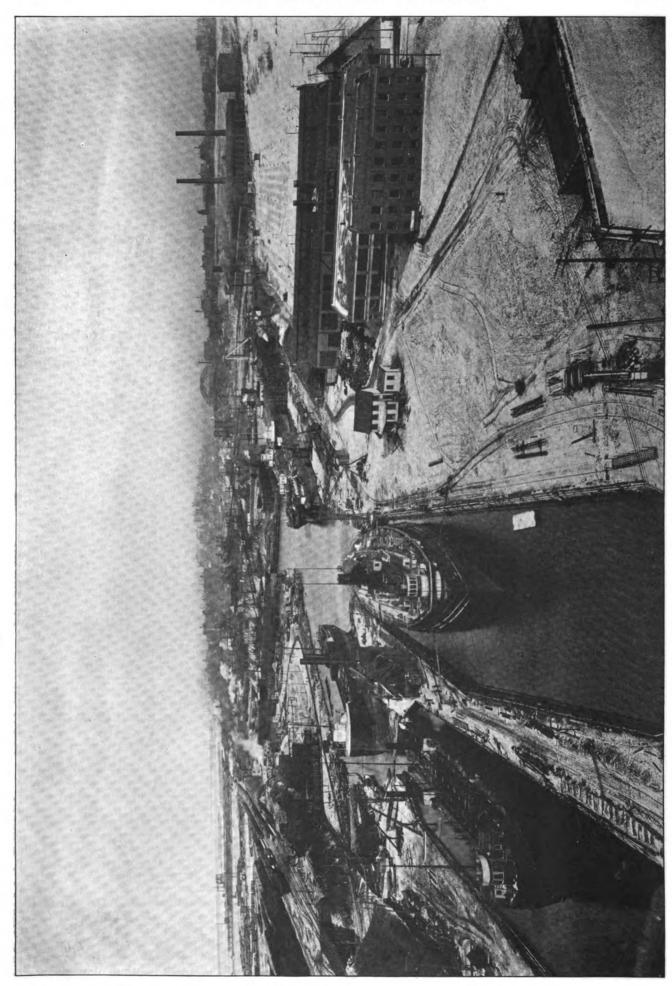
PLAN OF AMERICAN SHIP BUILDING CO., CLEVELAND, SHOWING NEW BUILDINGS AT RIGHT AND DRY DOCKS AT LEFT
